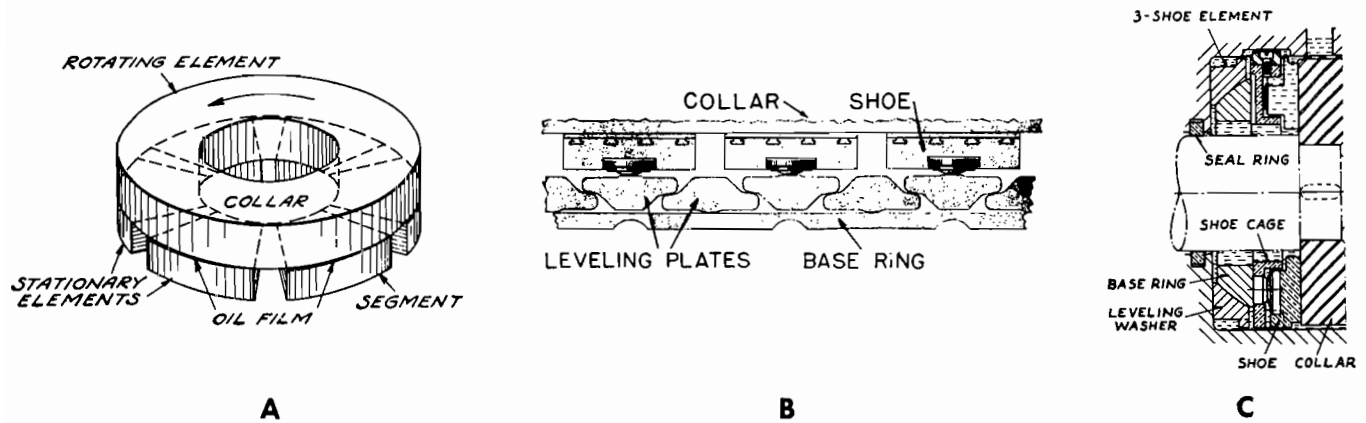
(a) Schematic Thrust Bearing, (b) Equalizer System, (c) Spherical Seat Arrangement. (Courtesy of Kingsbury Machine Works, Inc.)
